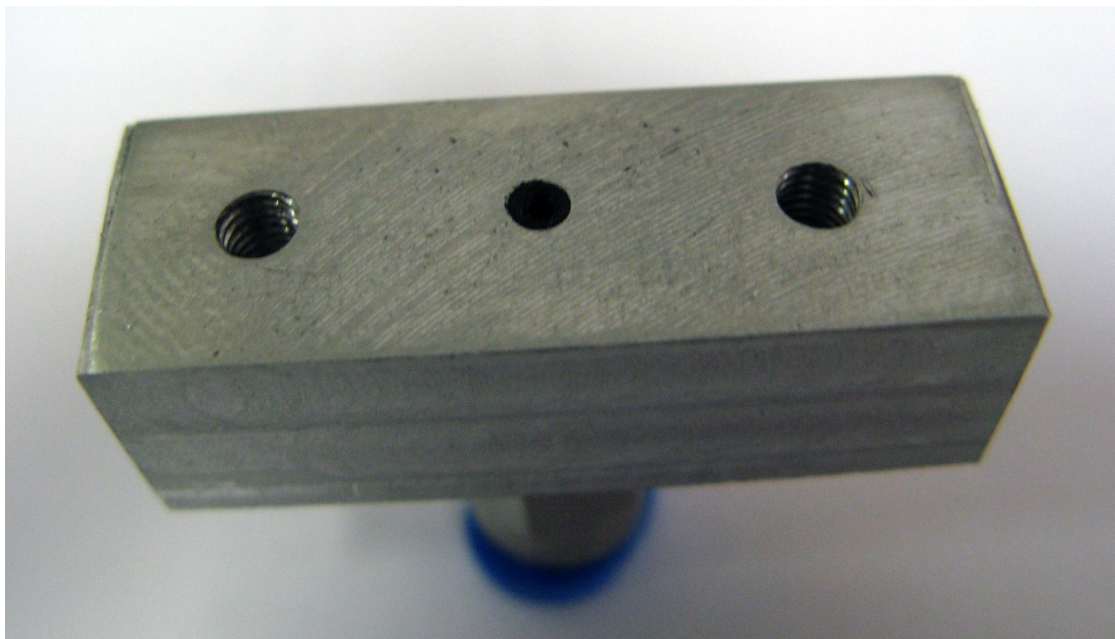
Saddle part of the fixture with gas port. Hole in the centre is saddle itself.
